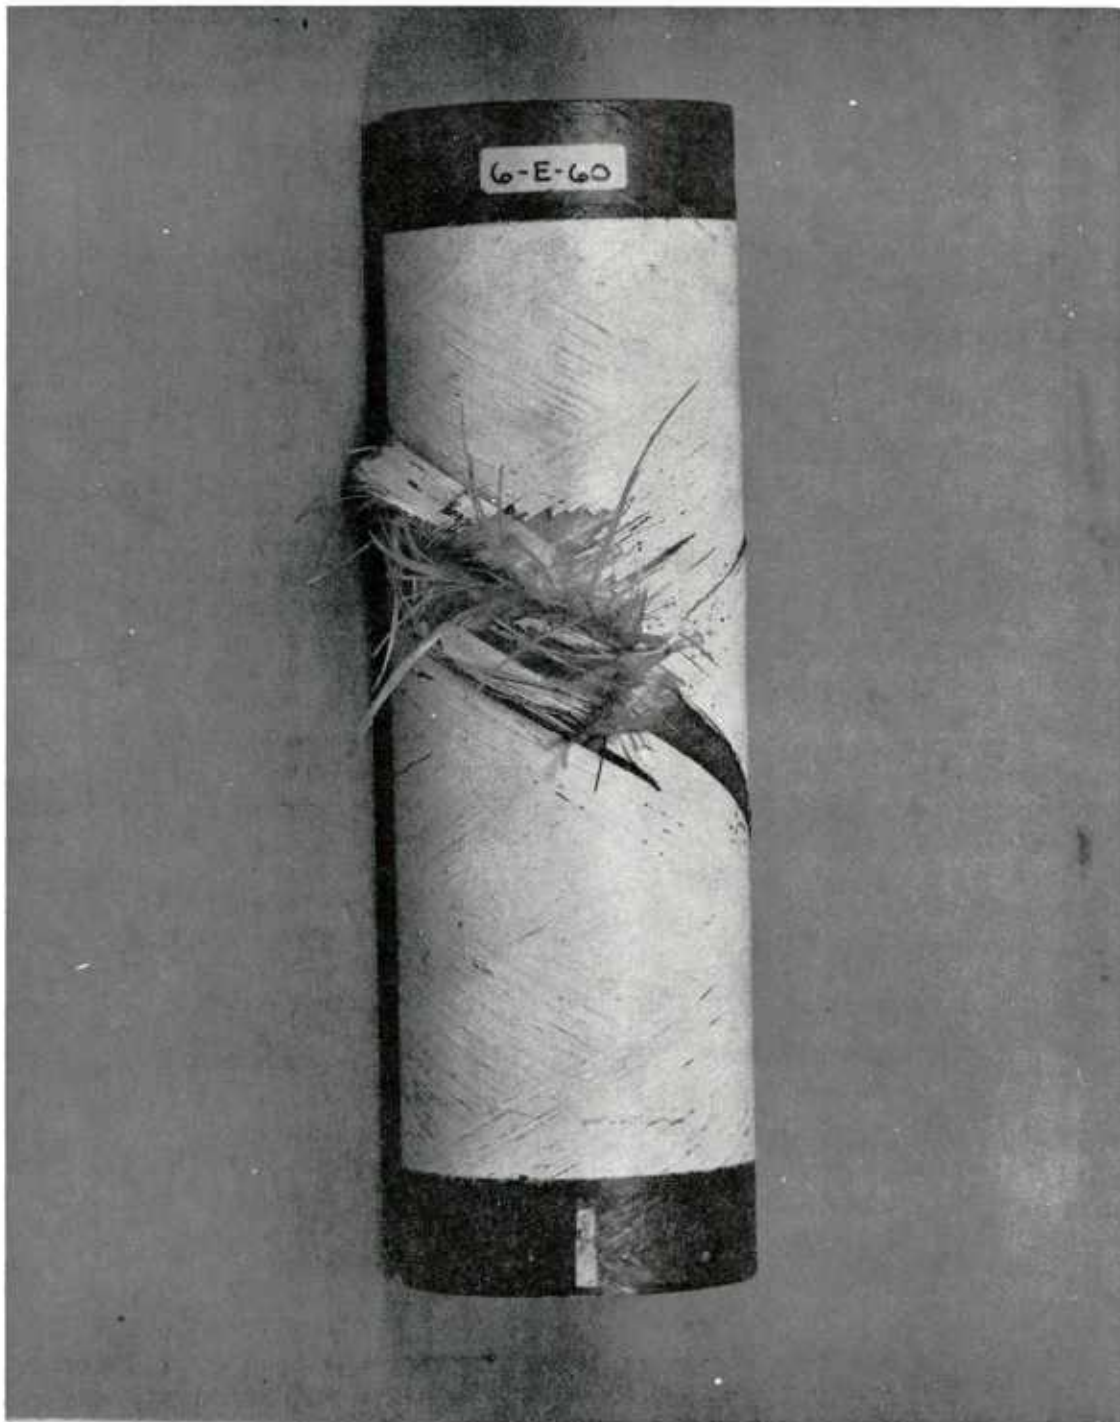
Cut flawed cylinder 6-E-60 pressurized to burst.
